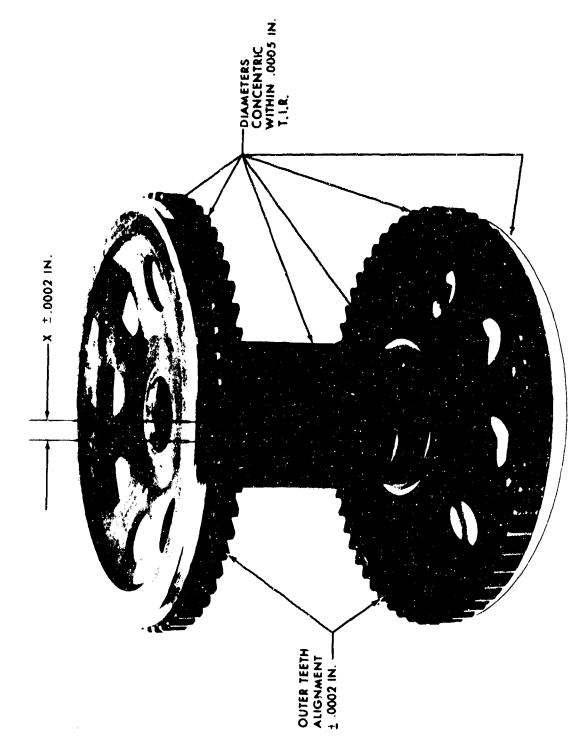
Tolerance Requirements, First-Row Pinion.
